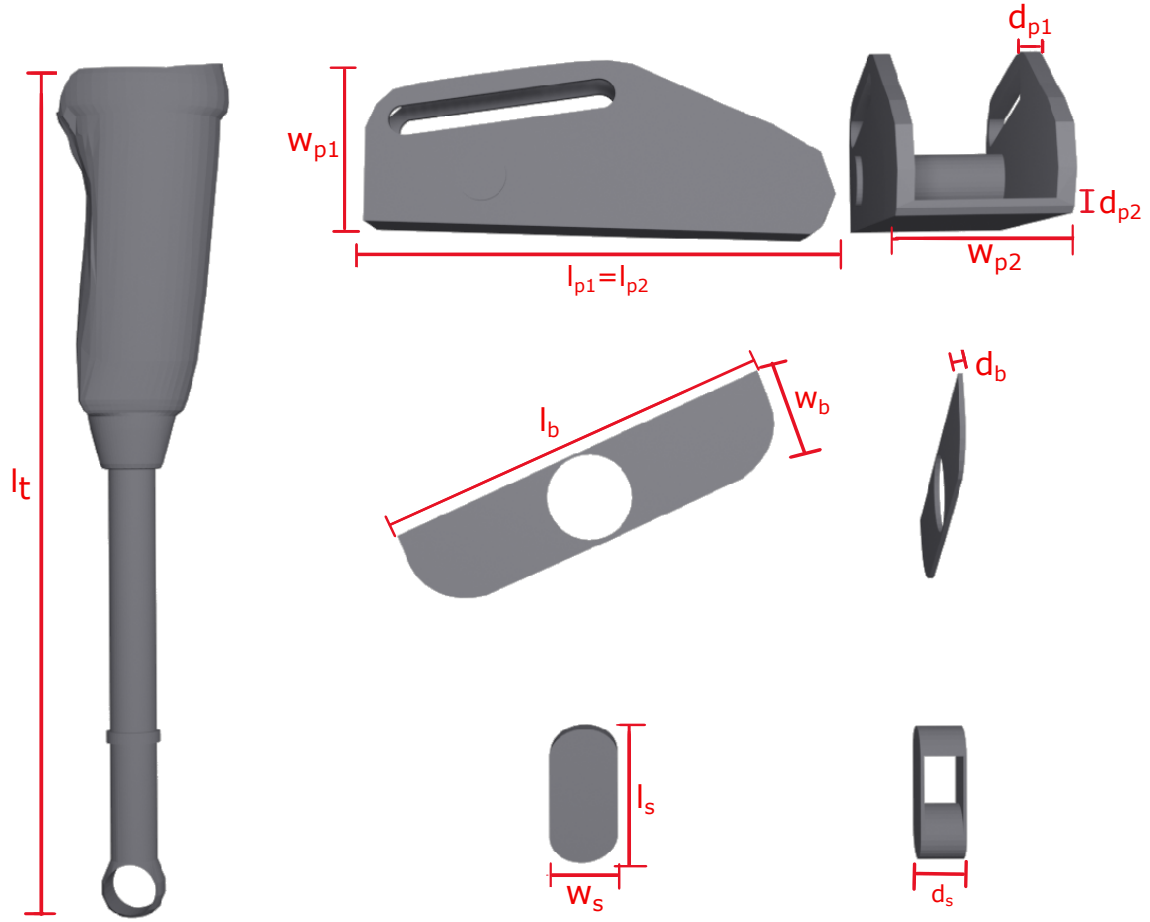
WalkMECH prosthesis geometry. Geometry of prosthetic parts for the walkMECH prosthesis with measurement indications [14]. Left: Side view of lower leg. Top right: Side and front view of foot. Middle right: side and front view of blocker plate. Bottom right: Side and front view of slider. Note: the proportions of the prosthetic parts with respect to each other are not realistic.
